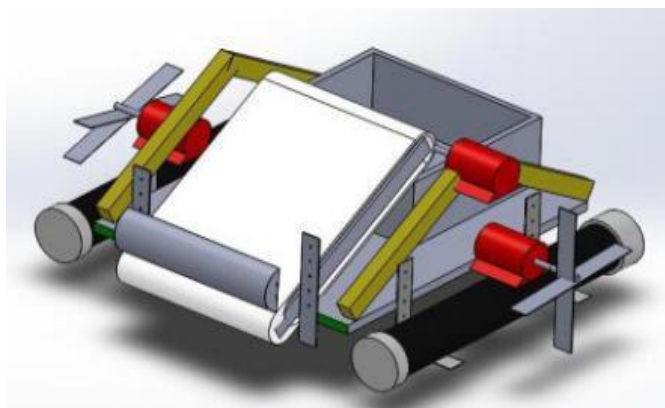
3D Design of the Robot front view (designed in SolidWorks)
